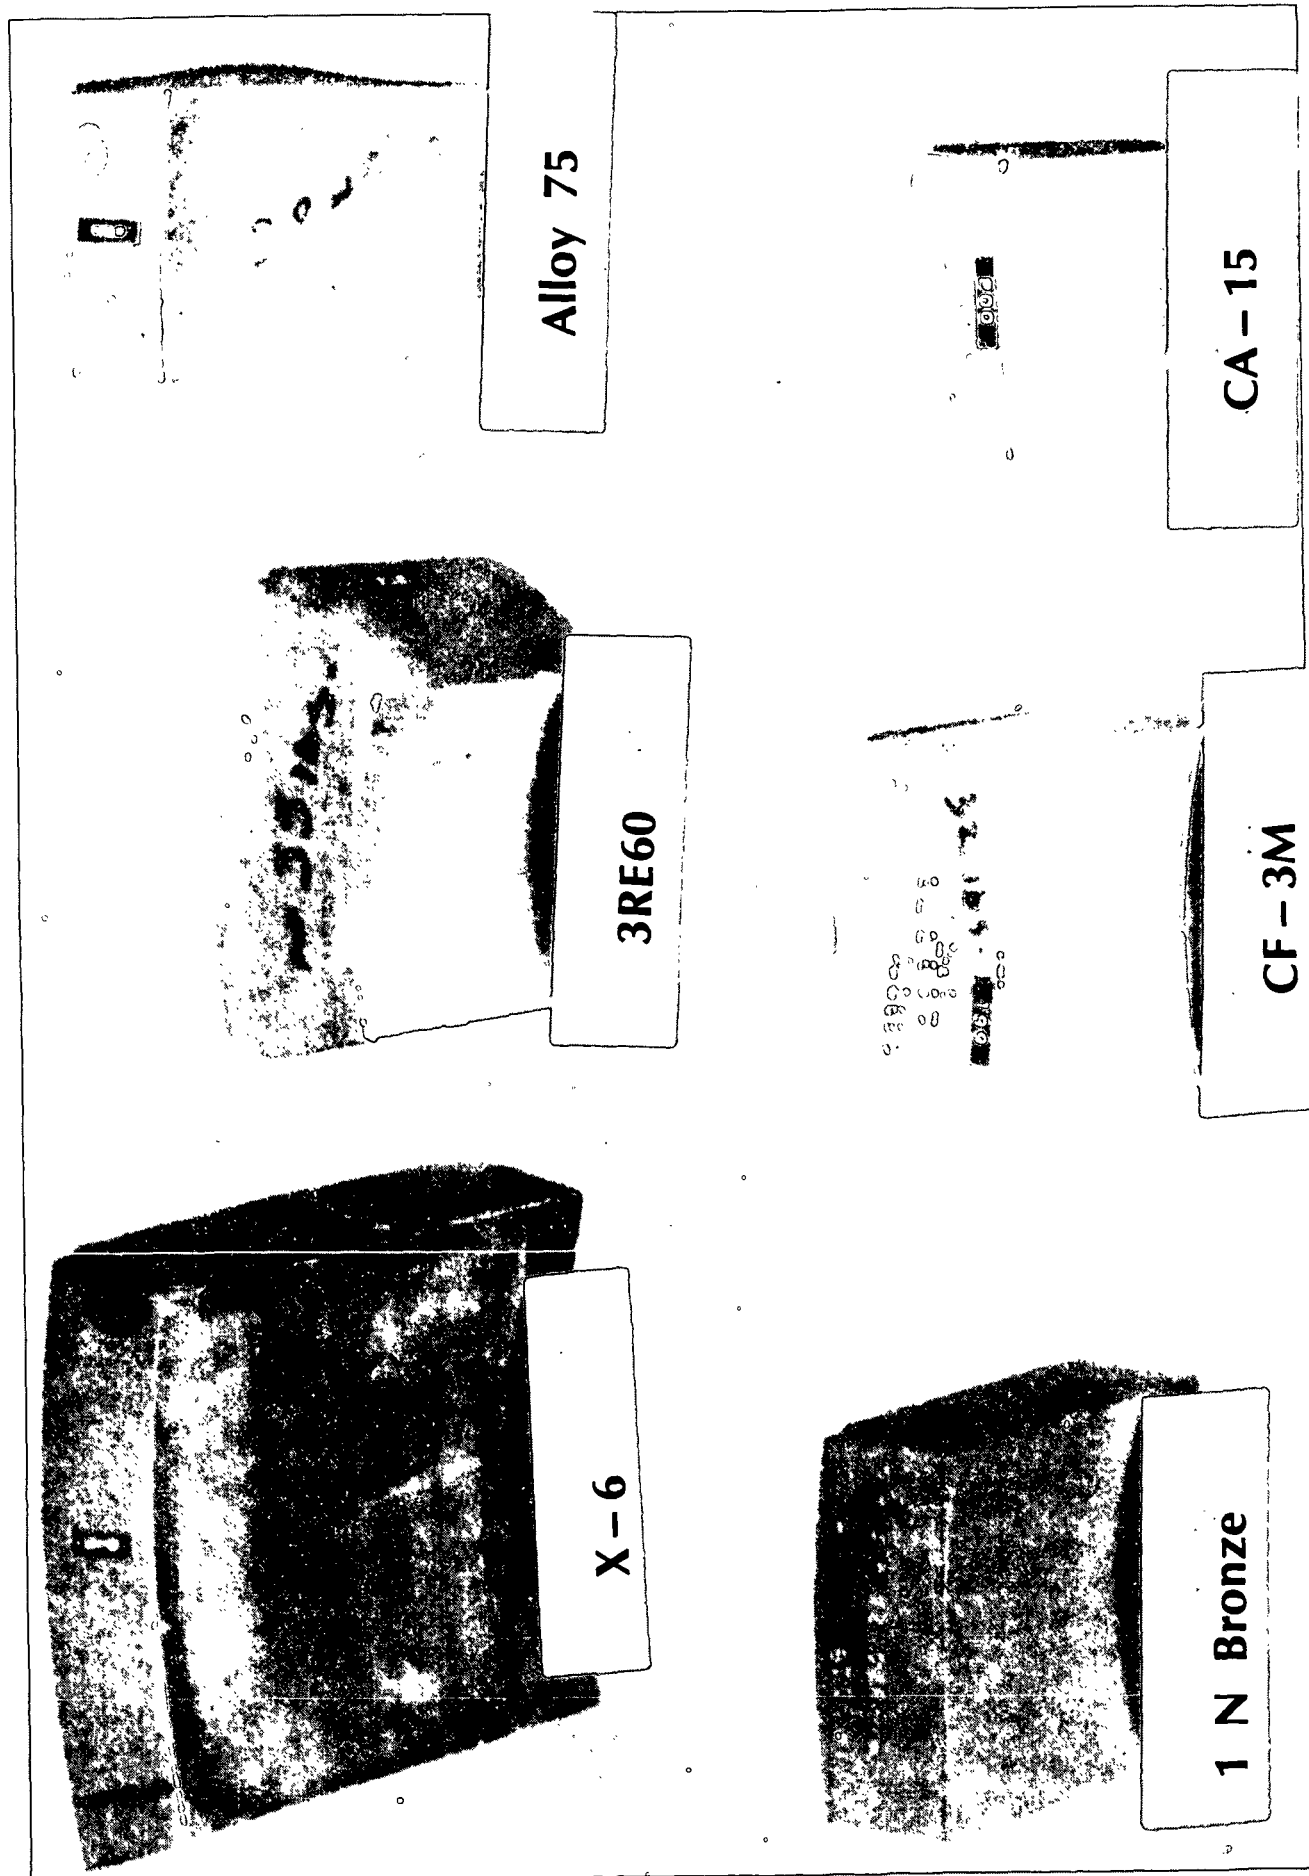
Photograph of test blocks from five cast, suction roll shells which were machined into corrosion test specimens. (Enlarged 2X.)
